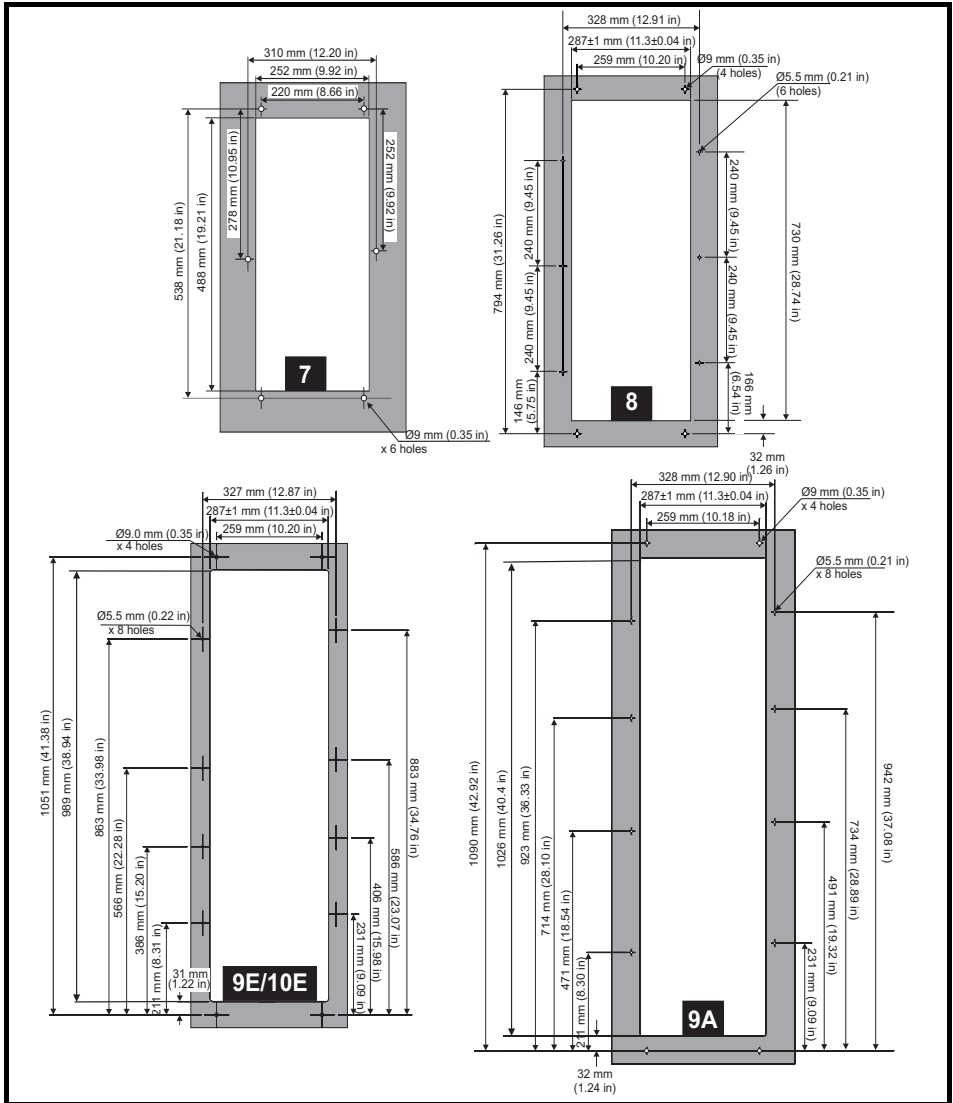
Surface mounting dimensions (size 7 to 10)
